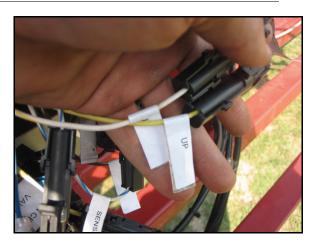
Directional Valve Boom Sense Adapter Cables Installed
